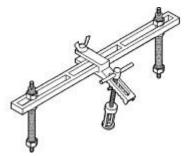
Spring Compressor Adapter 6526 Courtesy of CHRYSLER LLC
